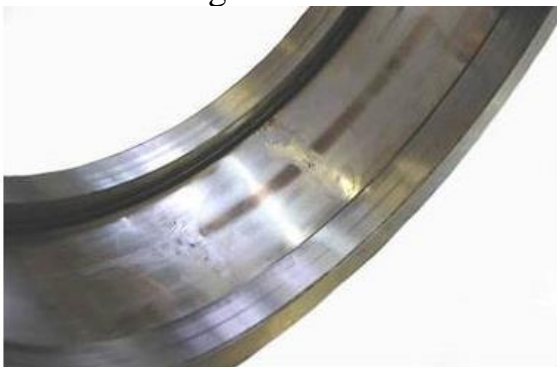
Corrosion shells and pitting on bearing rings and rollers
